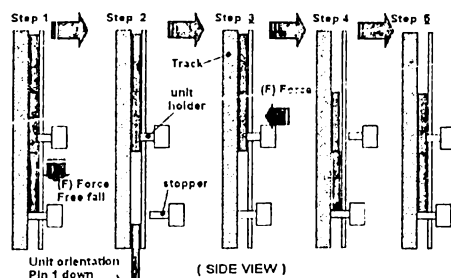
Singulator stopping and releasing unit. Unit holder force is perpendicular to the unit body
